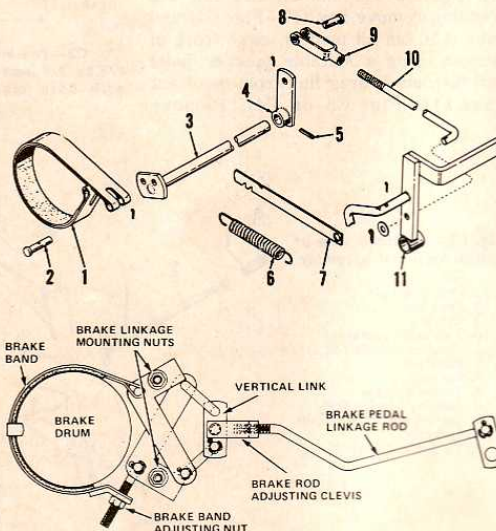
View showing brake linkage used on late model 444 and all model 224 and 446 tractors.
